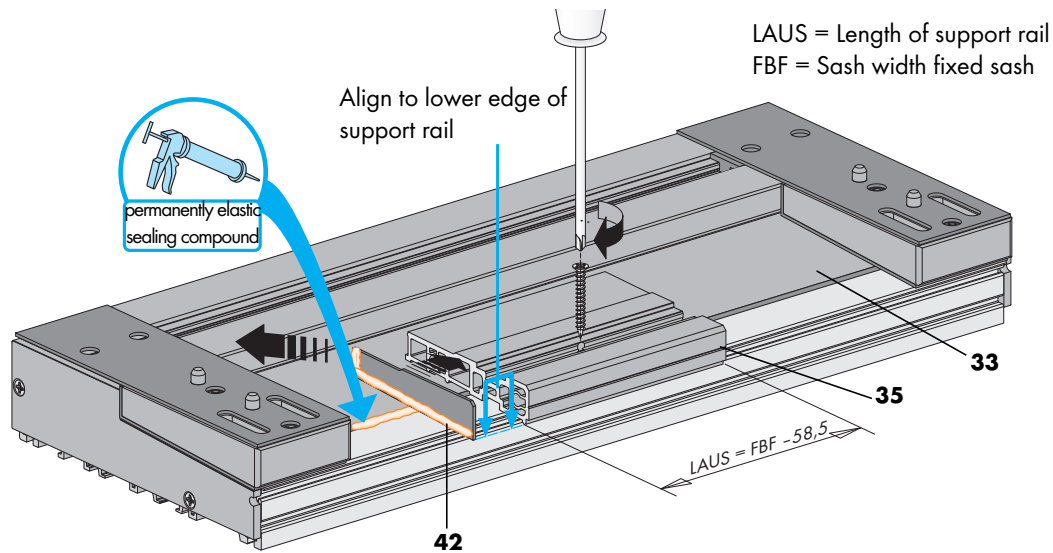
Mounting the end seal MP (42) and support rail ECO PASS S96 (35) to threshold ECO PASS (33)
